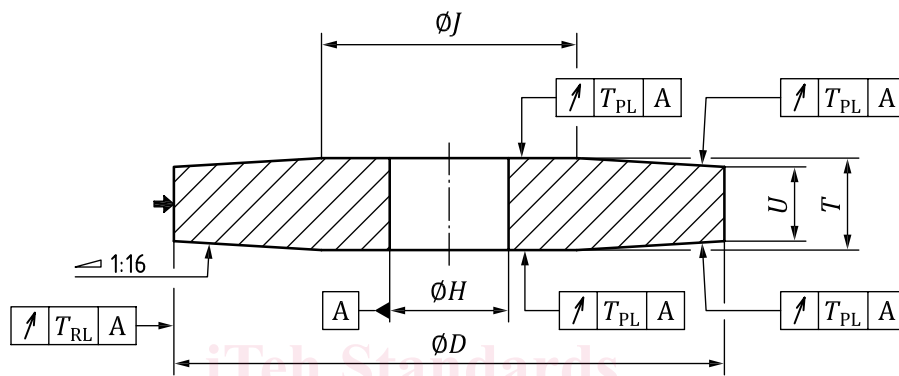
Grinding wheel, tapered on both sides (Type 4)
